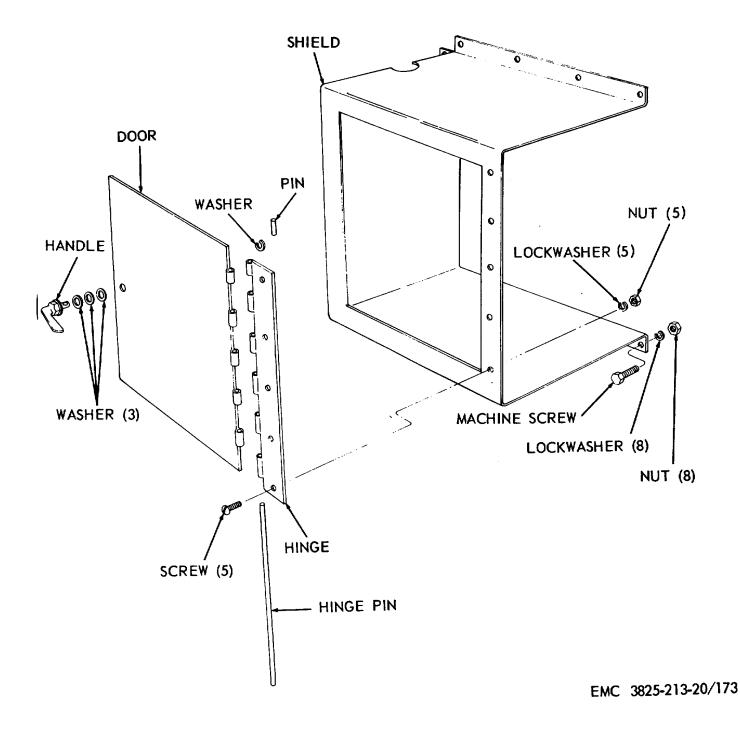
Carrier steering assembly gearbox shield, disassembly and reassembly, exploded view.
